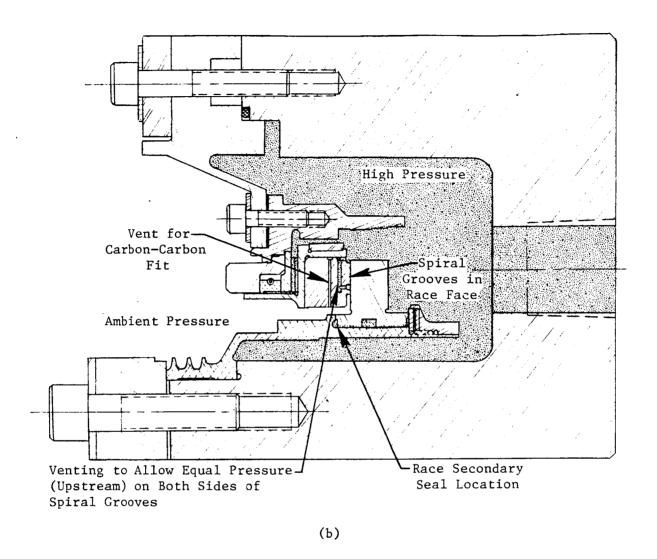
Final Design Assembled in Static Test Fixture. (Concluded)
